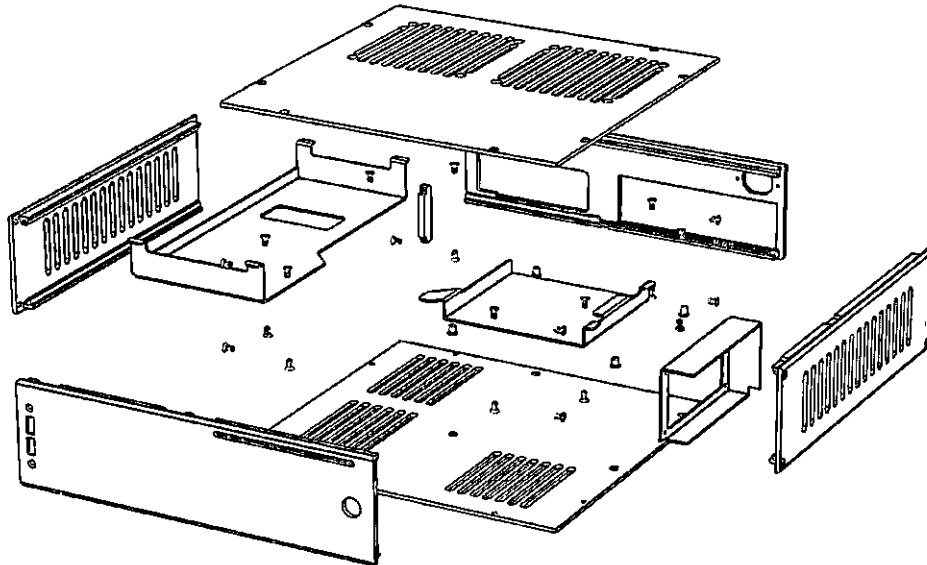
The M3A2 has a simple construction of extruded aluminum and formed parts for easy access. Curt Adkins.
